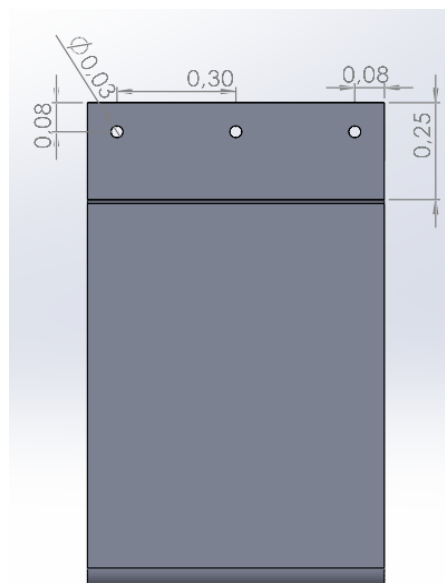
Dimension of holes that fix coupling and seabed structure.
